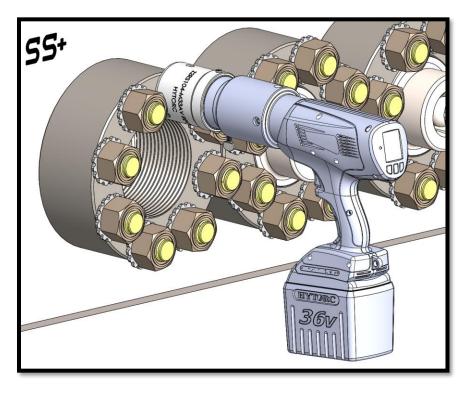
HYTORC 36-VOLT torque gun with HYTORC reaction washer drive assembly
